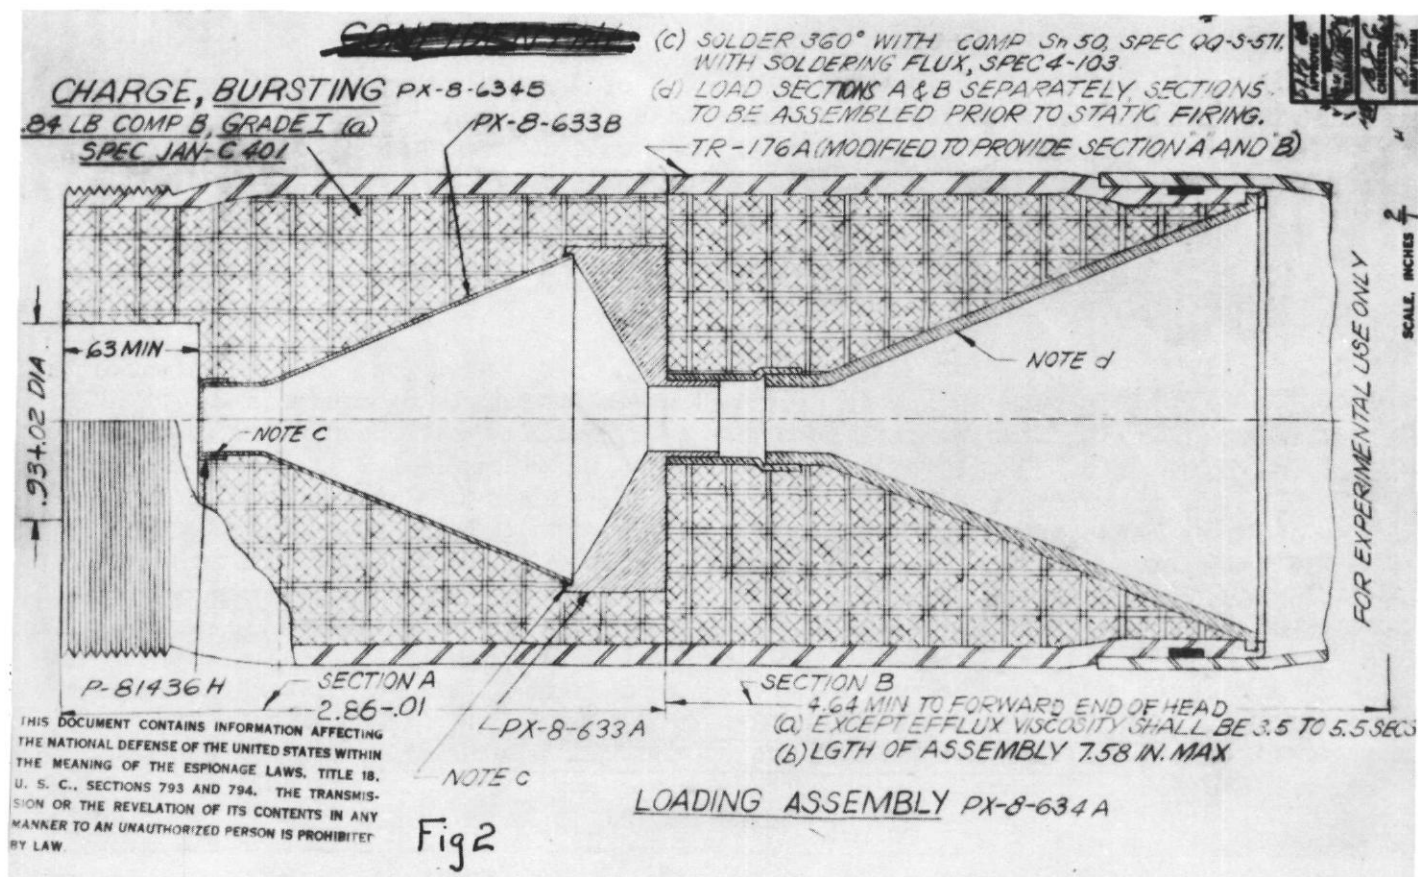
Rocket, HEAT, 2.36", T59E3, Loading Assembly.
